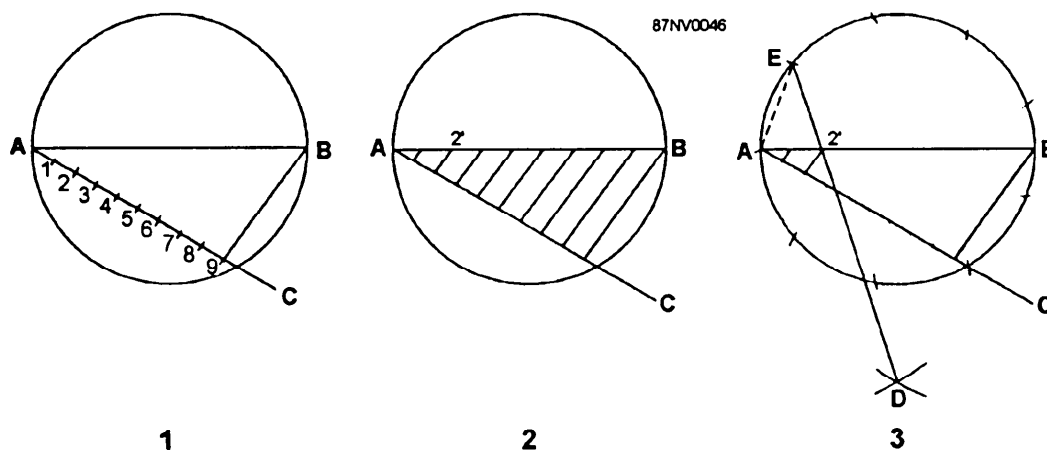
Layout for a nine-hole flange or flanges having any number of holes.
